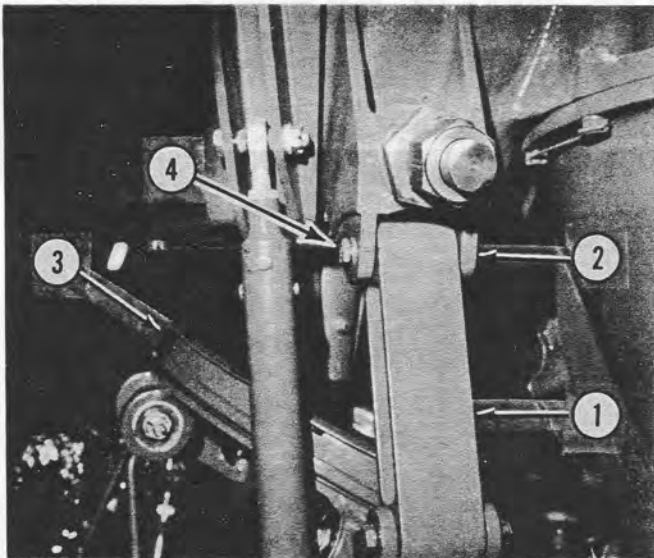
Ring seal 2. Flapper valve 3. Grease fitting
